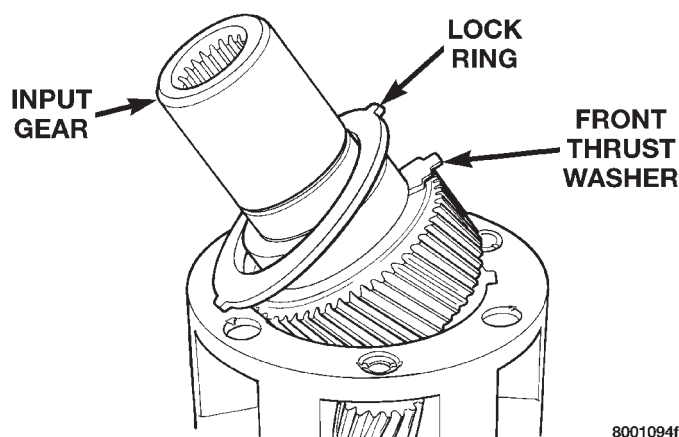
Input Gear, Carrier Lock Ring, And Rear thrust Washer Removal
